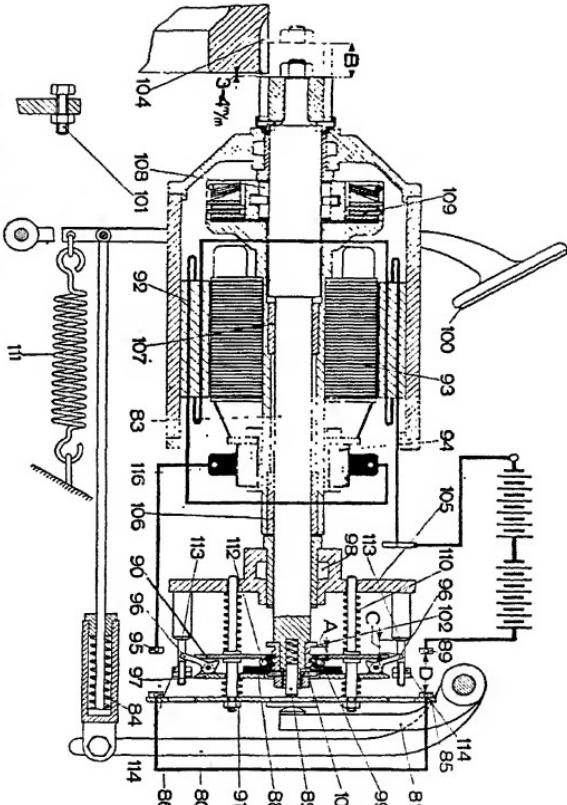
SCINTILLA STARTER WITH MECHANICAL ENGAGEMENT
